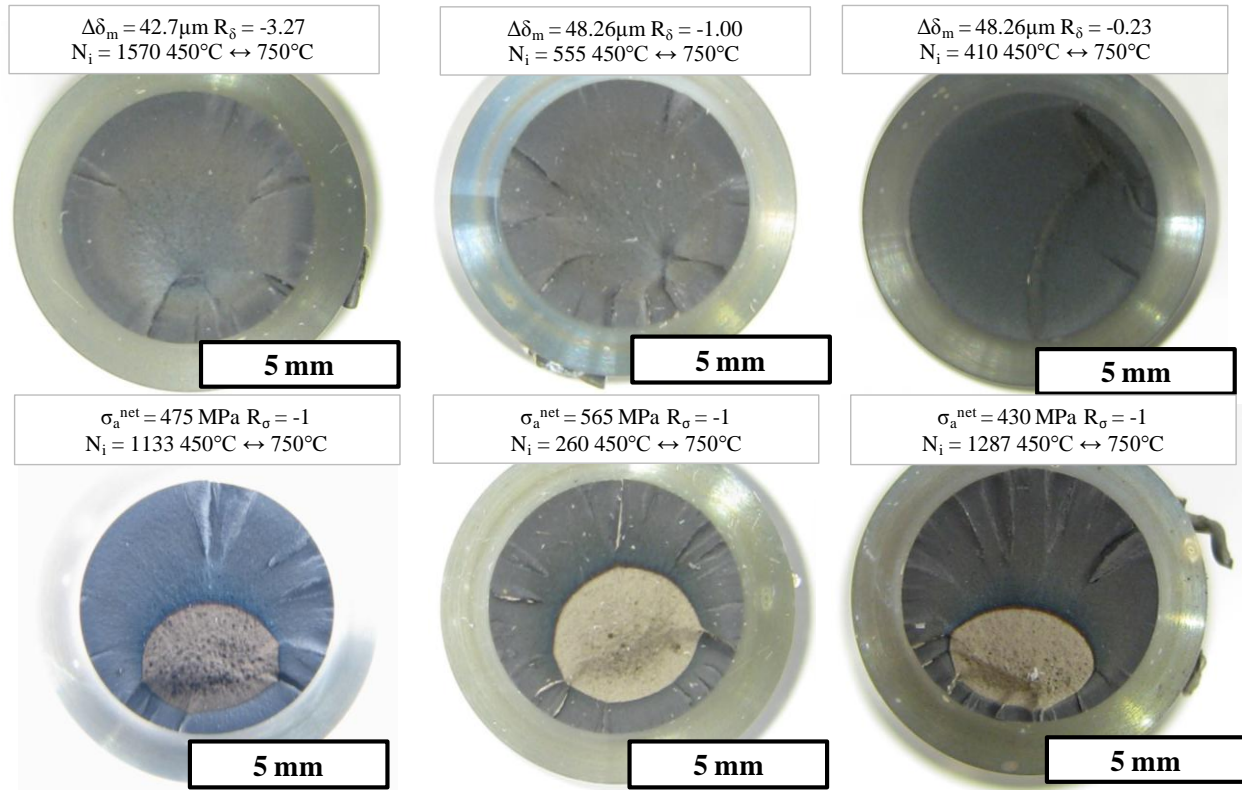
Fracture surfaces for OP TMF notch specimens. Top row are displacement control tests, bottom row are force control tests.
